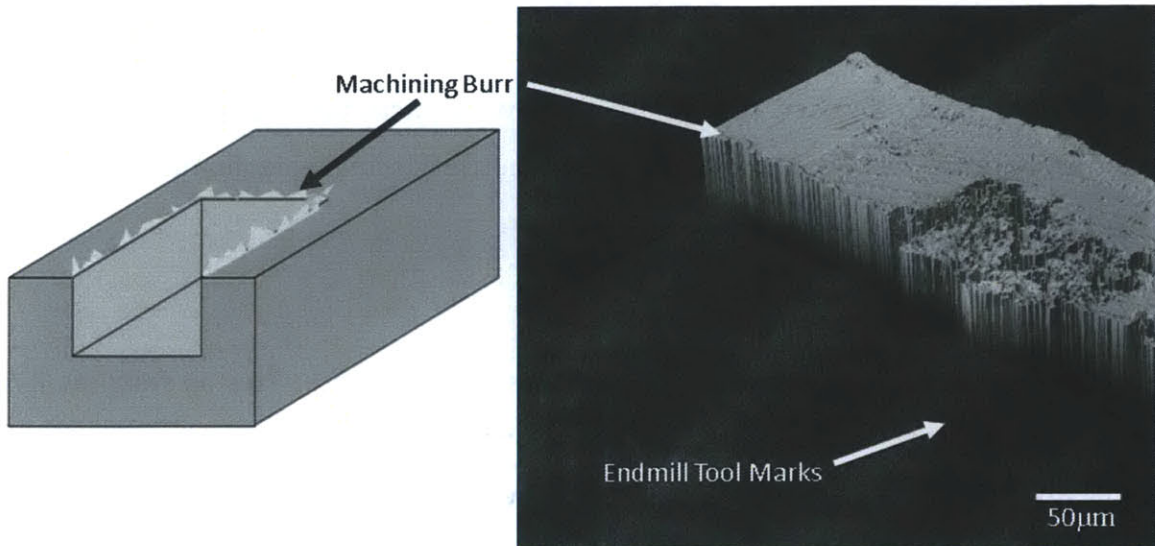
Cross sectional depiction of burrs on the edge of a possible machined channel (left). An interferometer image of a machined feature showing tool marks and possible burrs.
